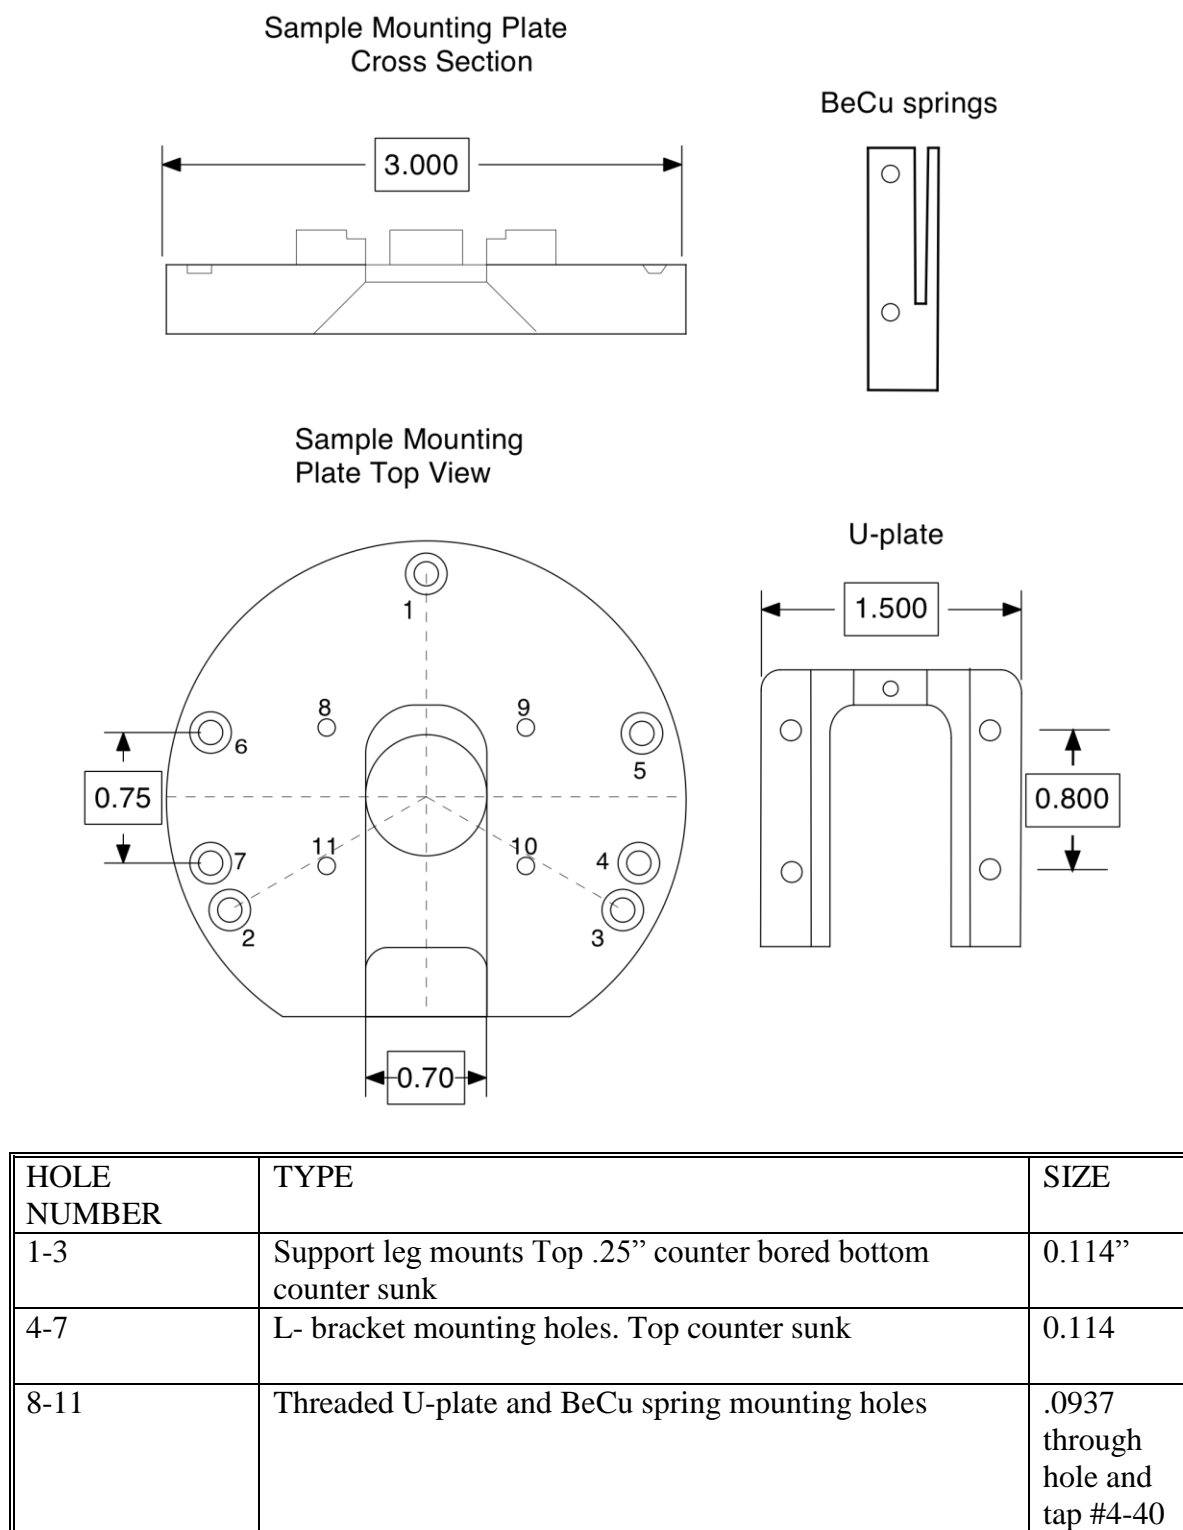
Sample holder assembly parts drawn 1:1 scale with a hole size table for the Macor sample mounting plate
